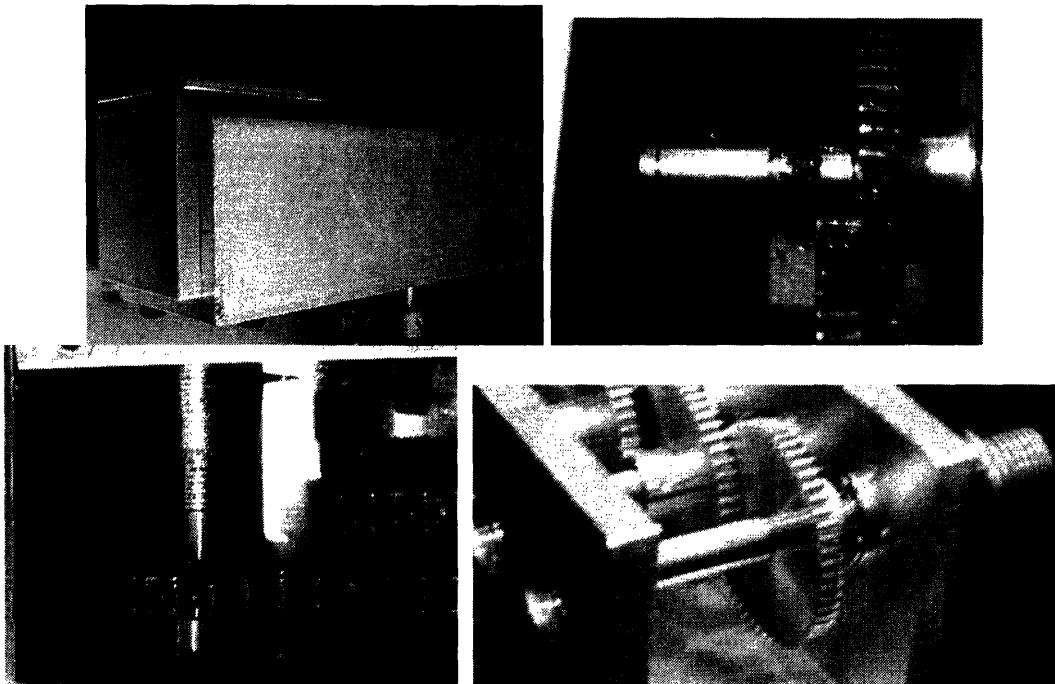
(Top left) Chassis photo showing location of primary axle. (Top right) Direct Drive improved primary axle. (Bottom right) Chain drive improved primary axle. (Bottom left) Original $\frac{1}{4}$ " axle that failed.
